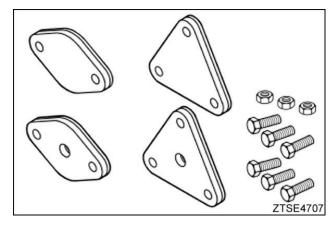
EGR Cooler Pressure Test Plates, ZTSE4707
